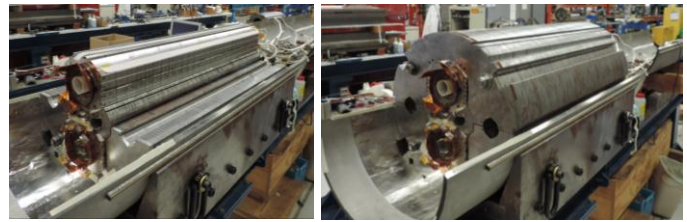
Assembly of two collared coils with the iron yoke and skin (left) and the 2-in-1 magnet cold mass inside the bottom half-skin (right).
